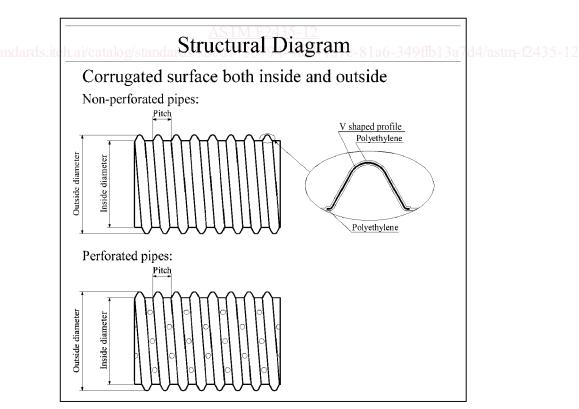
Single - Wall-Single-Wall Steel Reinforced Corrugated Polyethylene Pipe - Types I, III and IV
